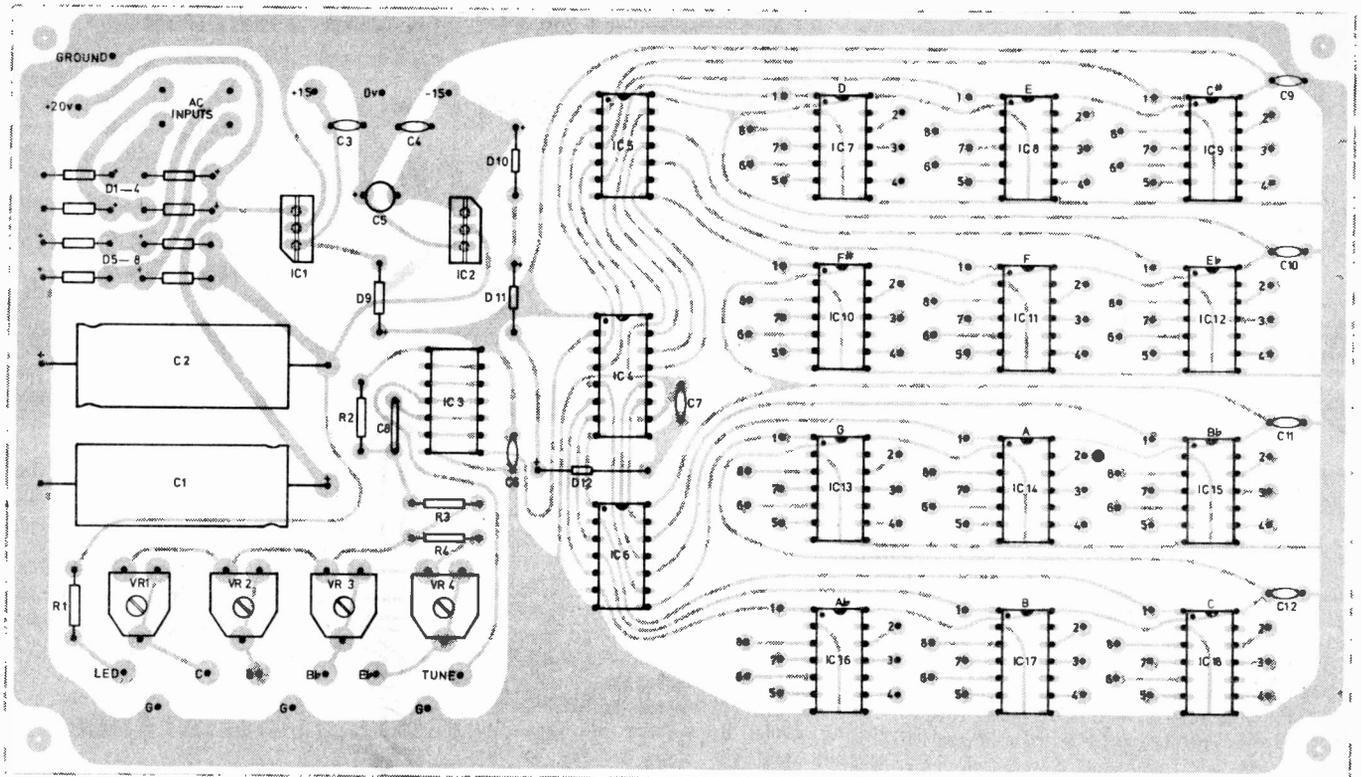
Component layout of P.S.U./Tone Generator p.c.b.
